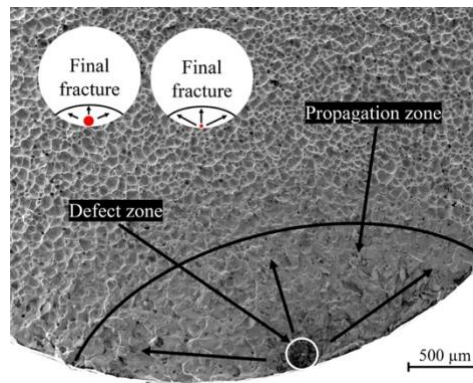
Fracture surface of a specimen from batch 2 (P180) showing the defect, fatigue crack propagation and final fracture zones; the insets illustrate fatigue samples where cracks initiated from either a large or a small defect.
